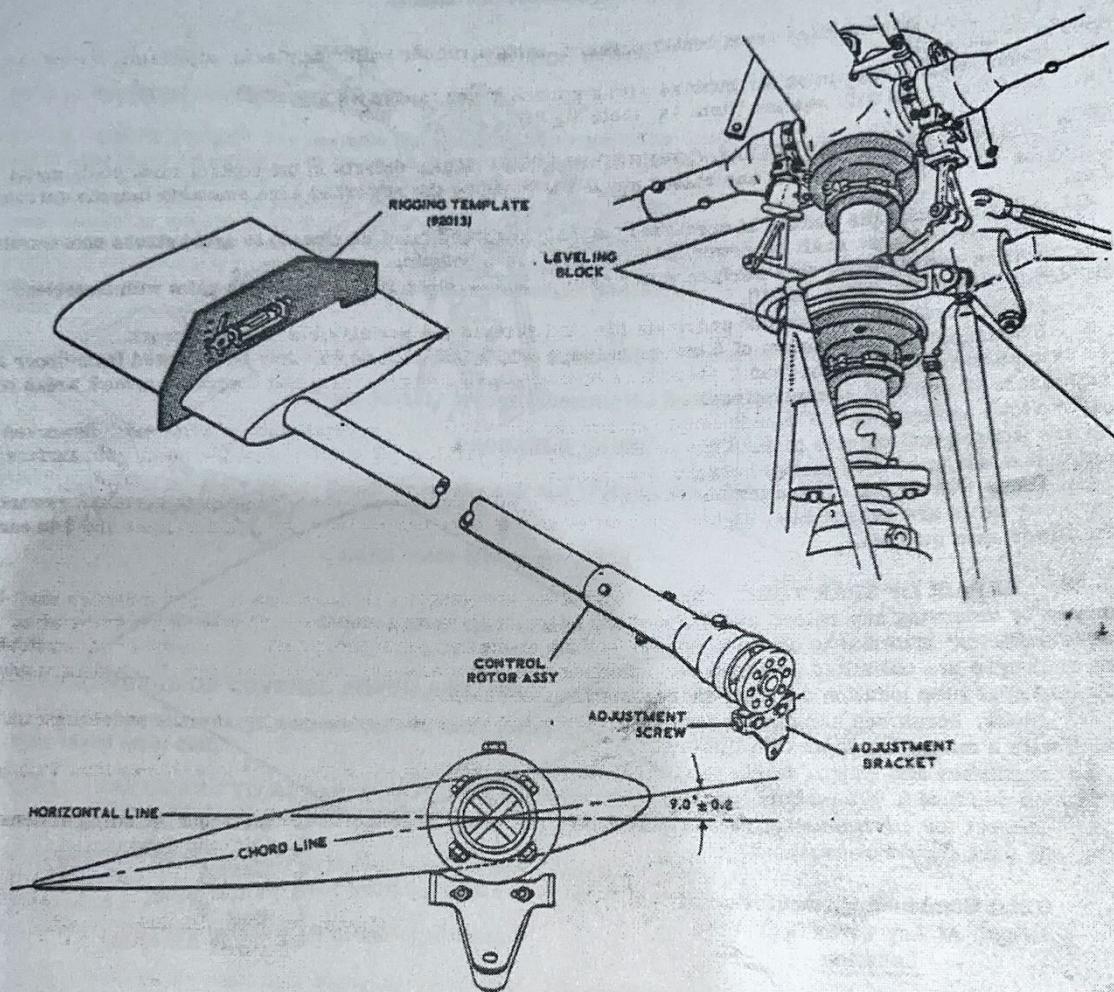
Setting Incidence Angle of Control Rotor Blade
